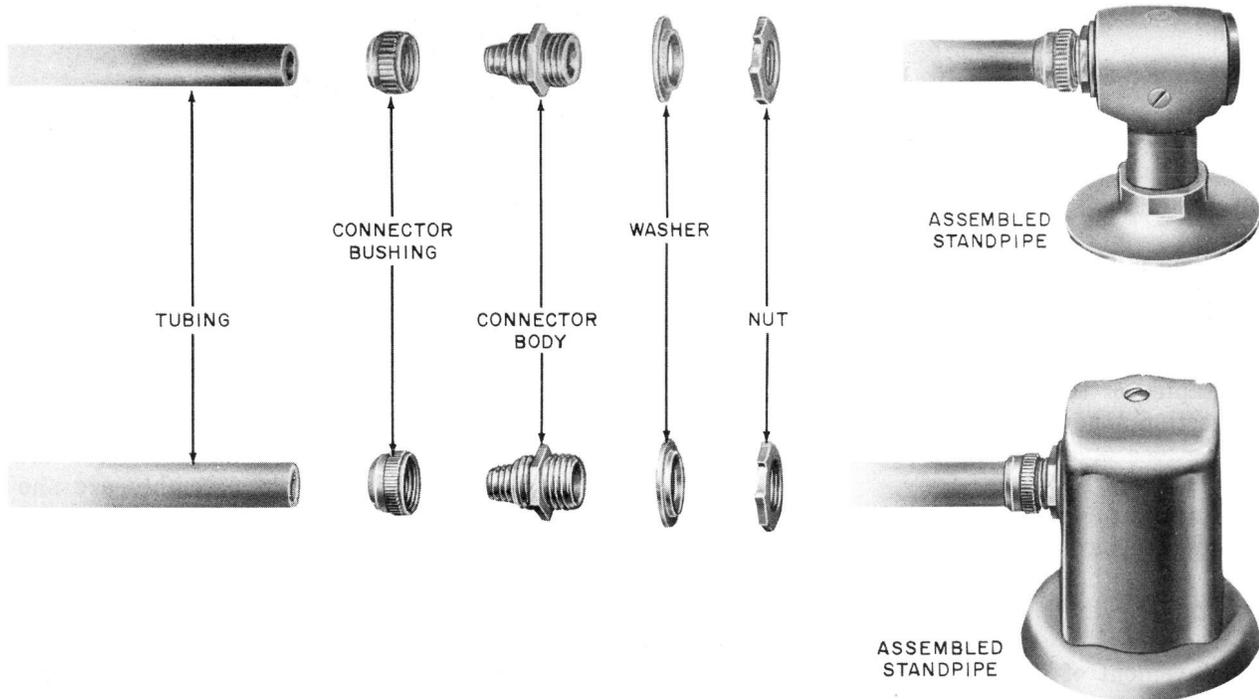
Assembly of Station Tubing Fittings to Standpipes That Are Part of a Permanent Underfloor Duct or Conduit System
